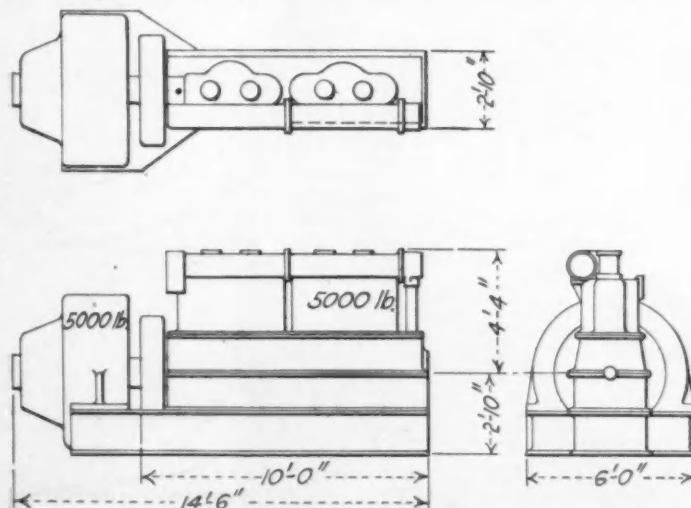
MOUNTING TWO OF THE ENGINES ON A COMMON BEDPLATE GIVES A 100-KW. GENERATING SET
